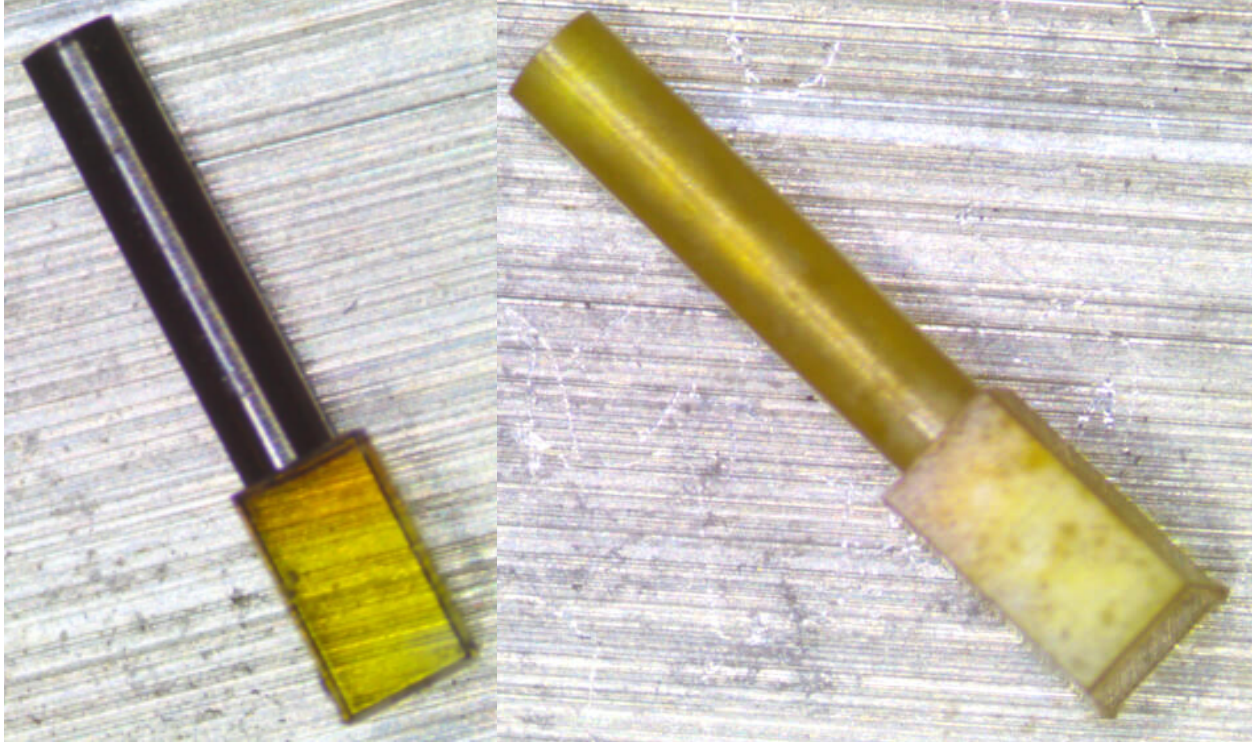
(Left) Partially machined diamond rod. (Right) Partially machined diamond rod after baking in furnace at 600 °C.
